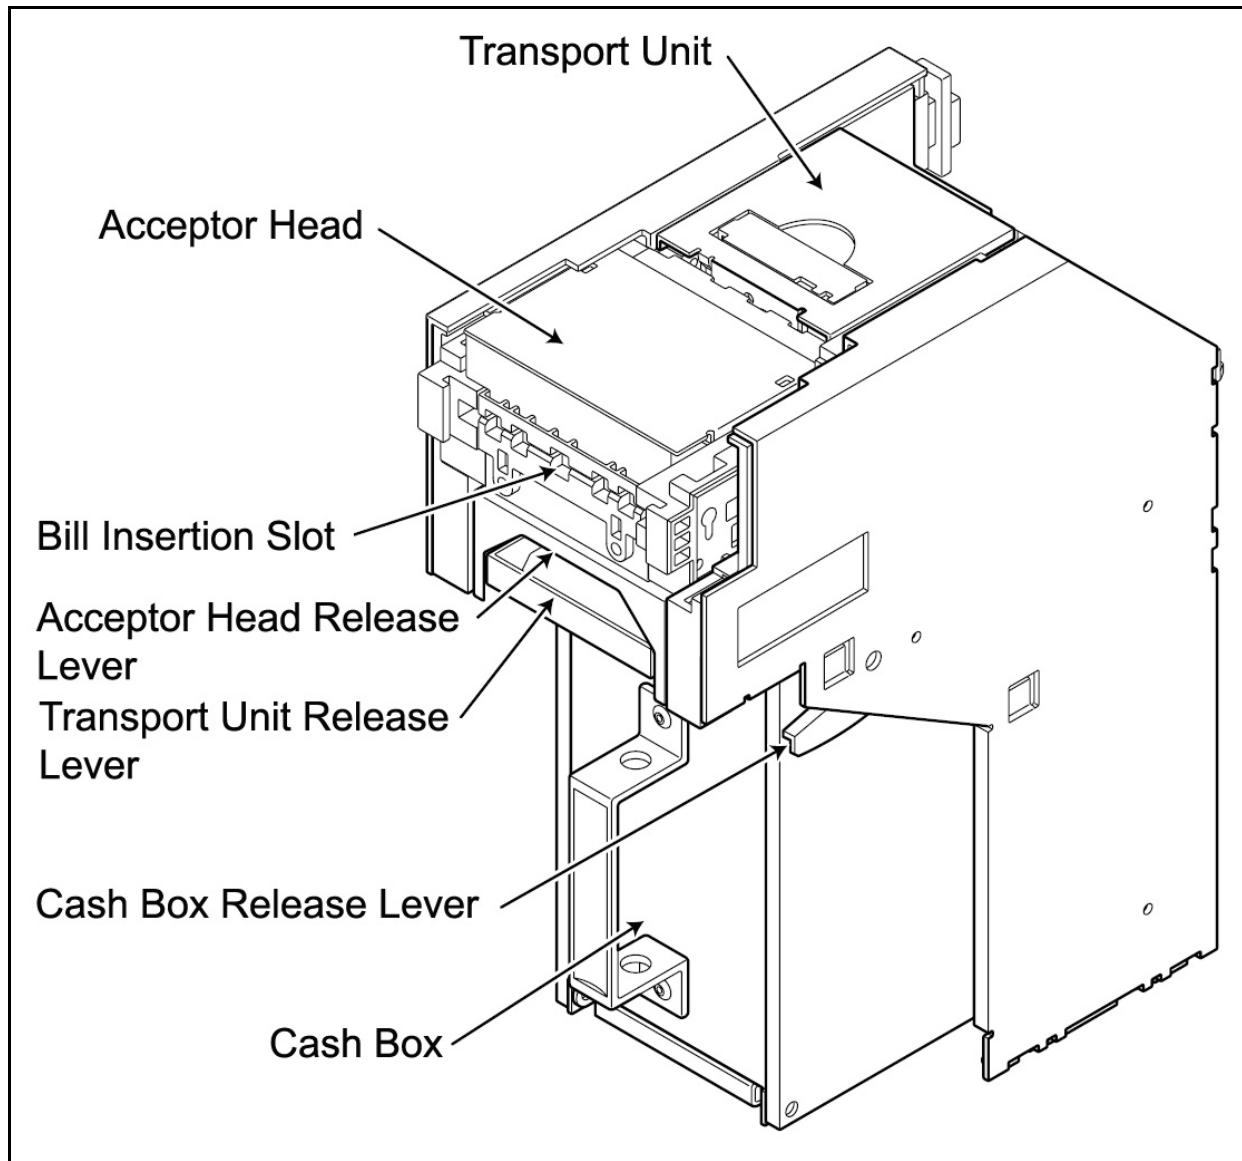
World Bill Acceptor (WBA) Major Component Parts
